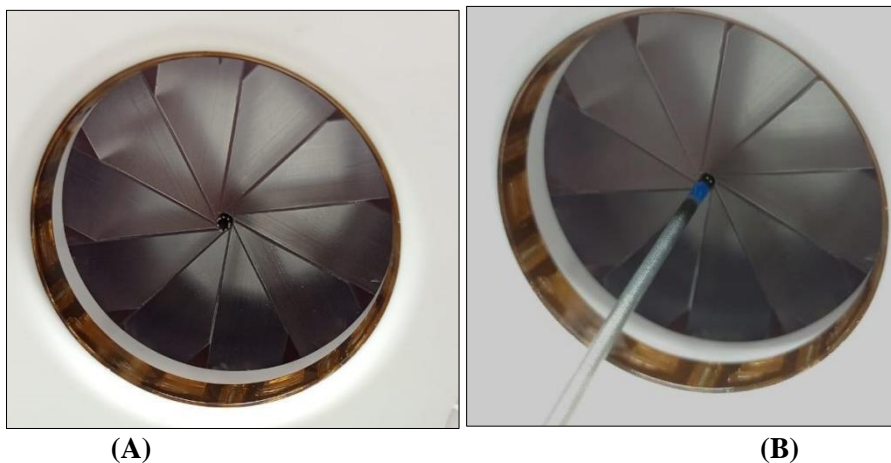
Crimping the Urethral Stent through Crimping Machine for Inserting into the Braided Tube
